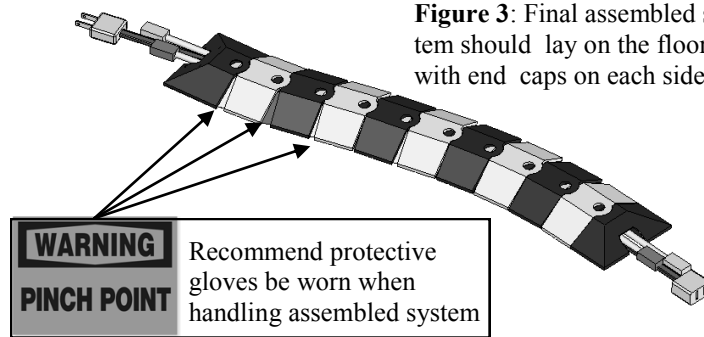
Final assembled system should lay on the floor flat with end caps on each side.
